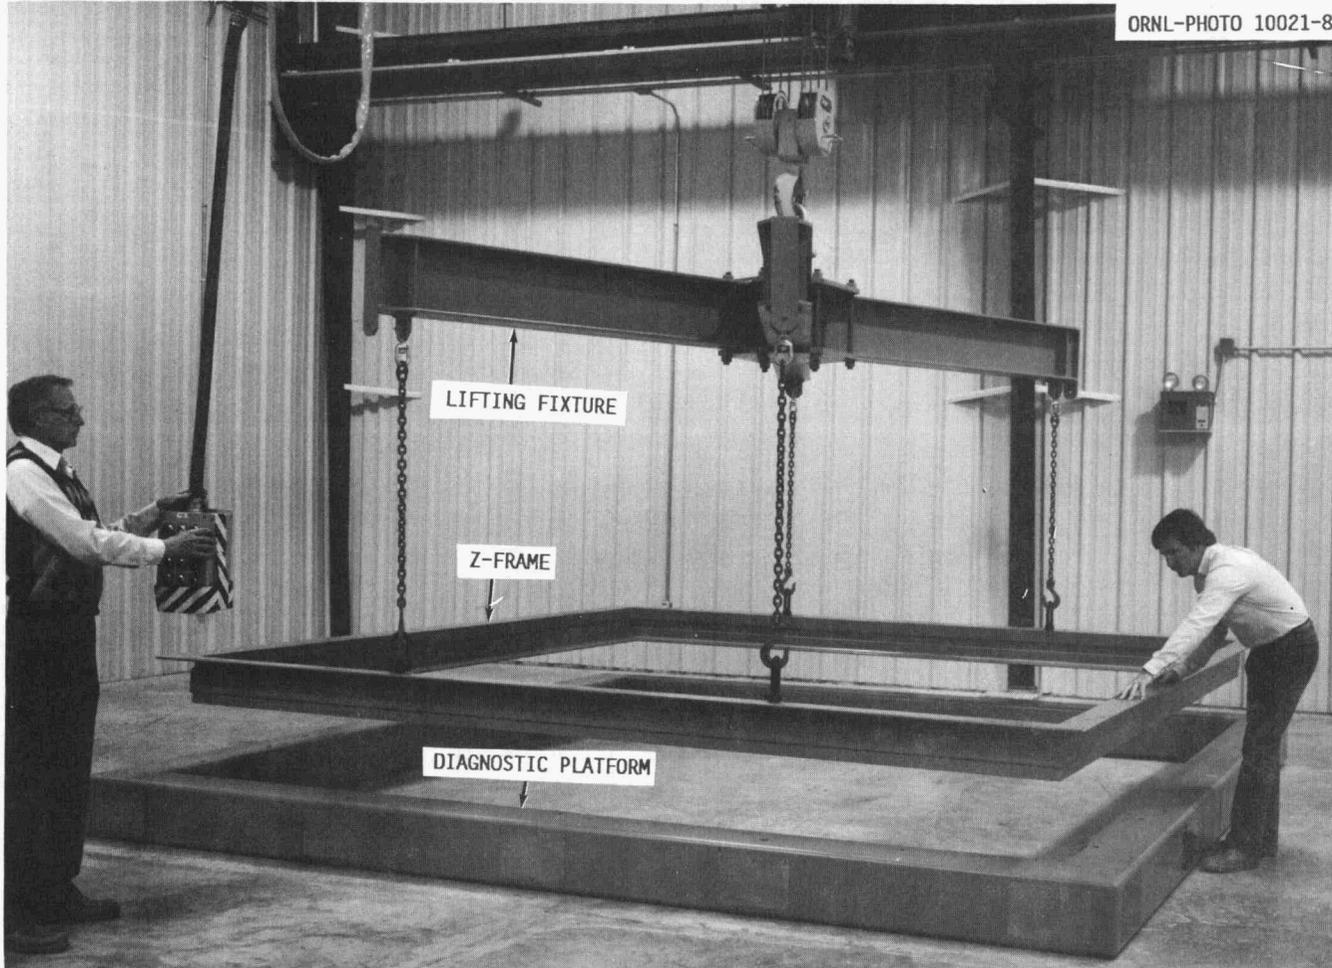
Using the lifting fixture to install the Z-frame into the Diagnostic Platform crane.
